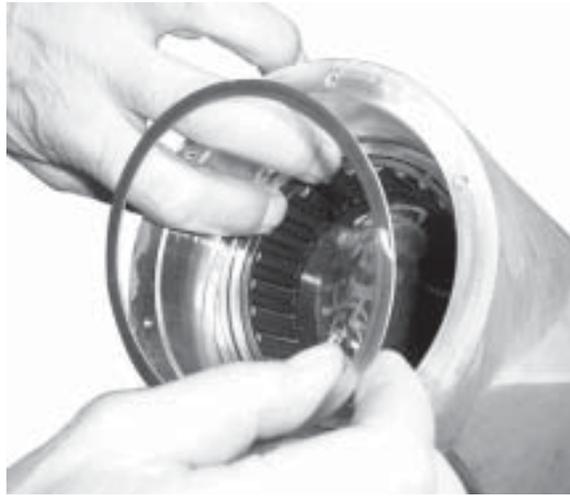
Installing Rear Bearing Spiral-Lock Retainer Ring
